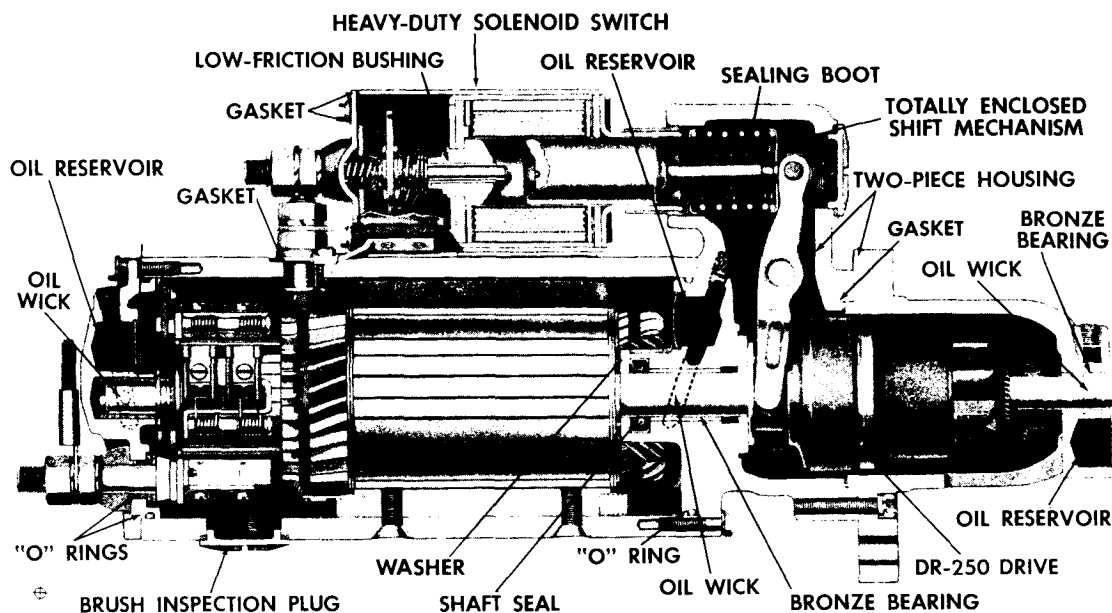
Cross-sectional view of motor with DR-250 heavy duty drive (50-MT).
